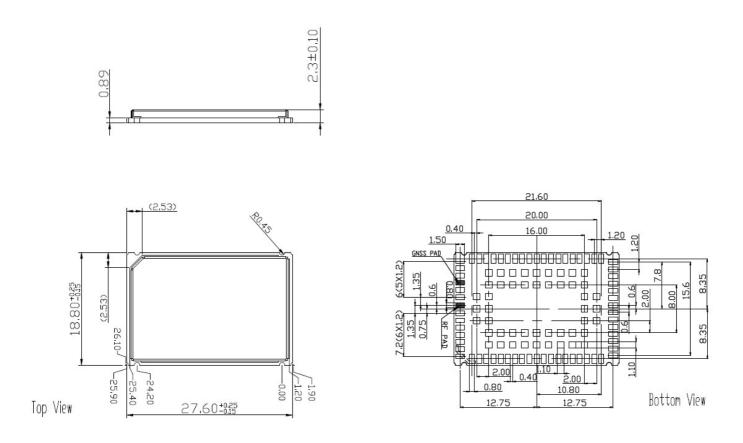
Dimensions of EXSx2-W (all dimensions in mm)
